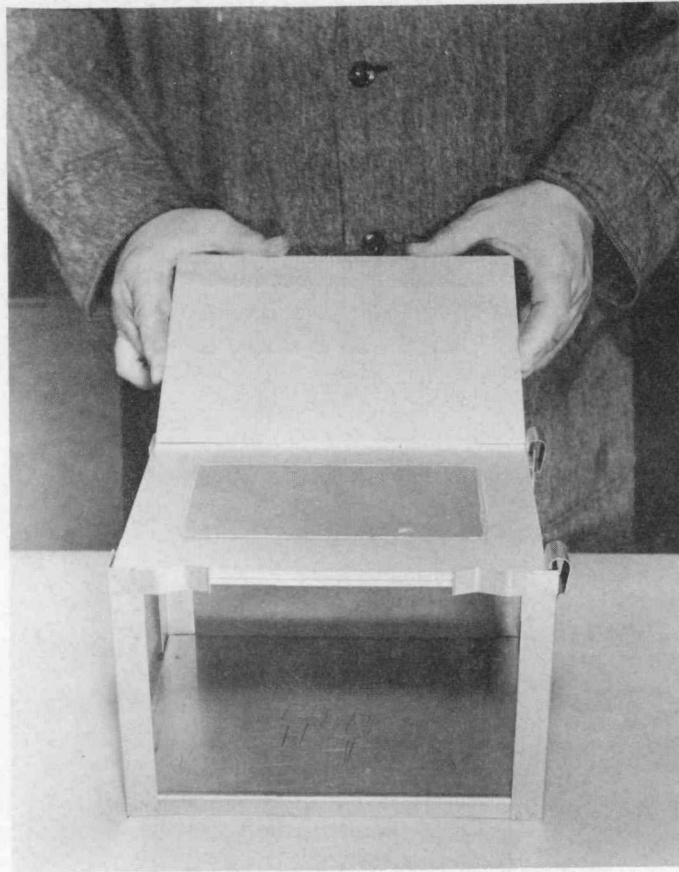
Assembly of components after silicon coating the cladding pieces.
